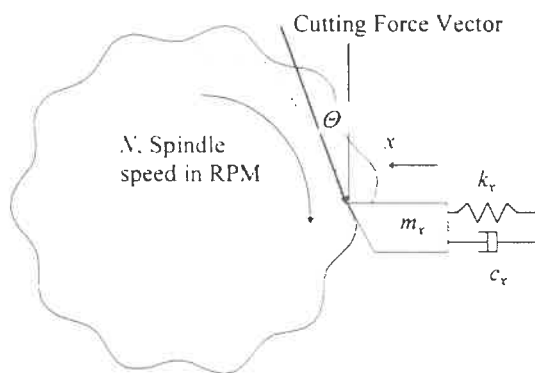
Diagram of a workpiece and cutting tool on a single degree-of-freedom spring/damper system.
